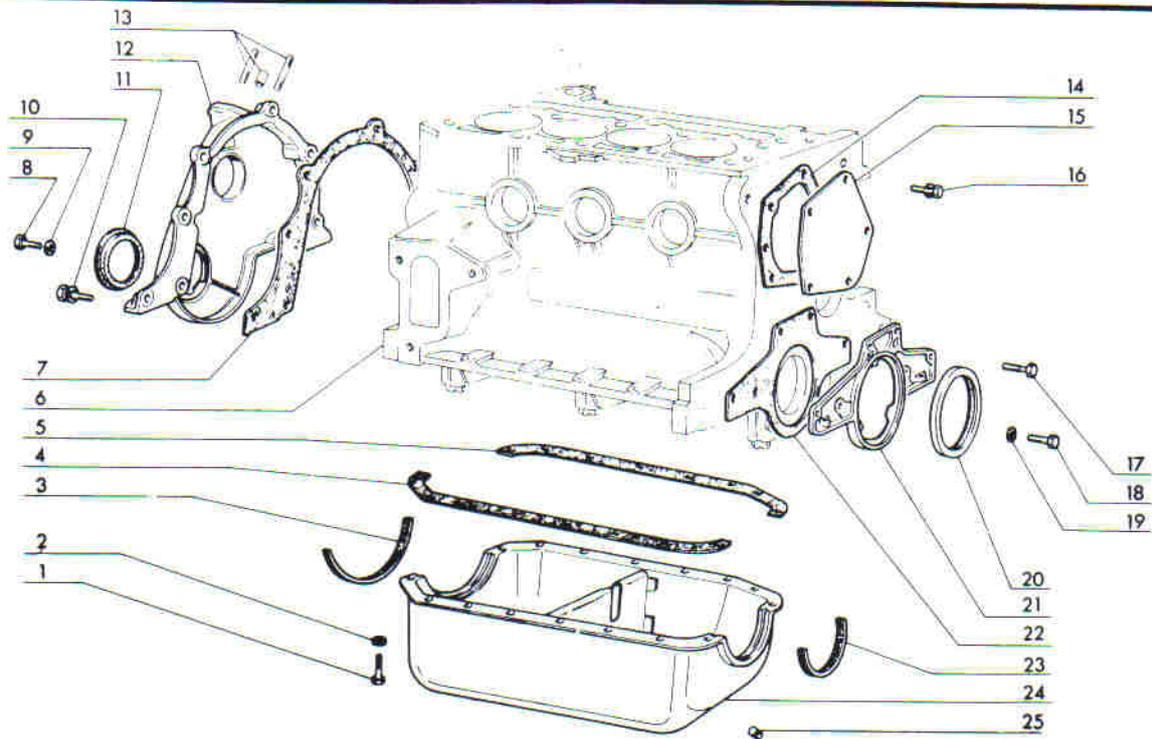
Timing gear cover, sump, oil seals and gaskets (Sec 16)
